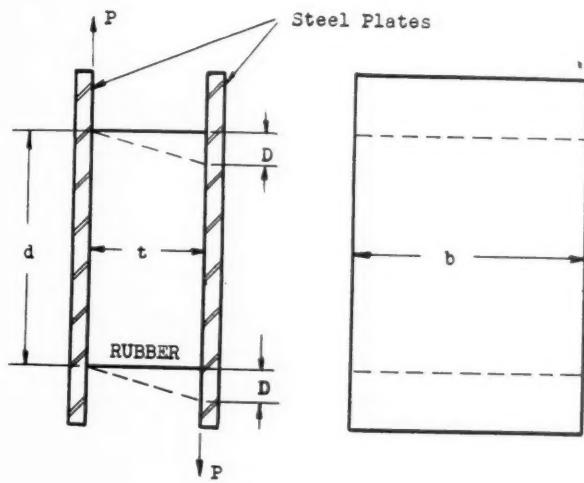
Shear-Type Rubber Spring. The Unstressed Rubber Section Is a Rectangle
